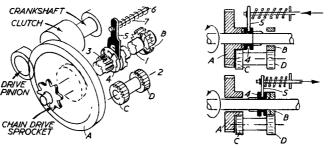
SIMPLIFIED DIAGRAMMATIC ILLUSTRATION OF THE GEARBOX The top right-hand sketch shows 2nd gear engaged with the drive between gear A and the mainshaft, gear A locked to the mainshaft (1) by the dog (4). Lower right sketch shows Ist gear position, drive being through gears C and D on lay-shaft (2) to gear B now locked to mainshaft (1) by dog (4). The dog is moved to the gear selection positions by the selector fork (5) moving on its spindle (6). The spring (7) tends to move the selector to 2nd gear position. In neutral position the dog (4) is in the central position on the mainshaft (1) and thus disengaged from both A and B.
